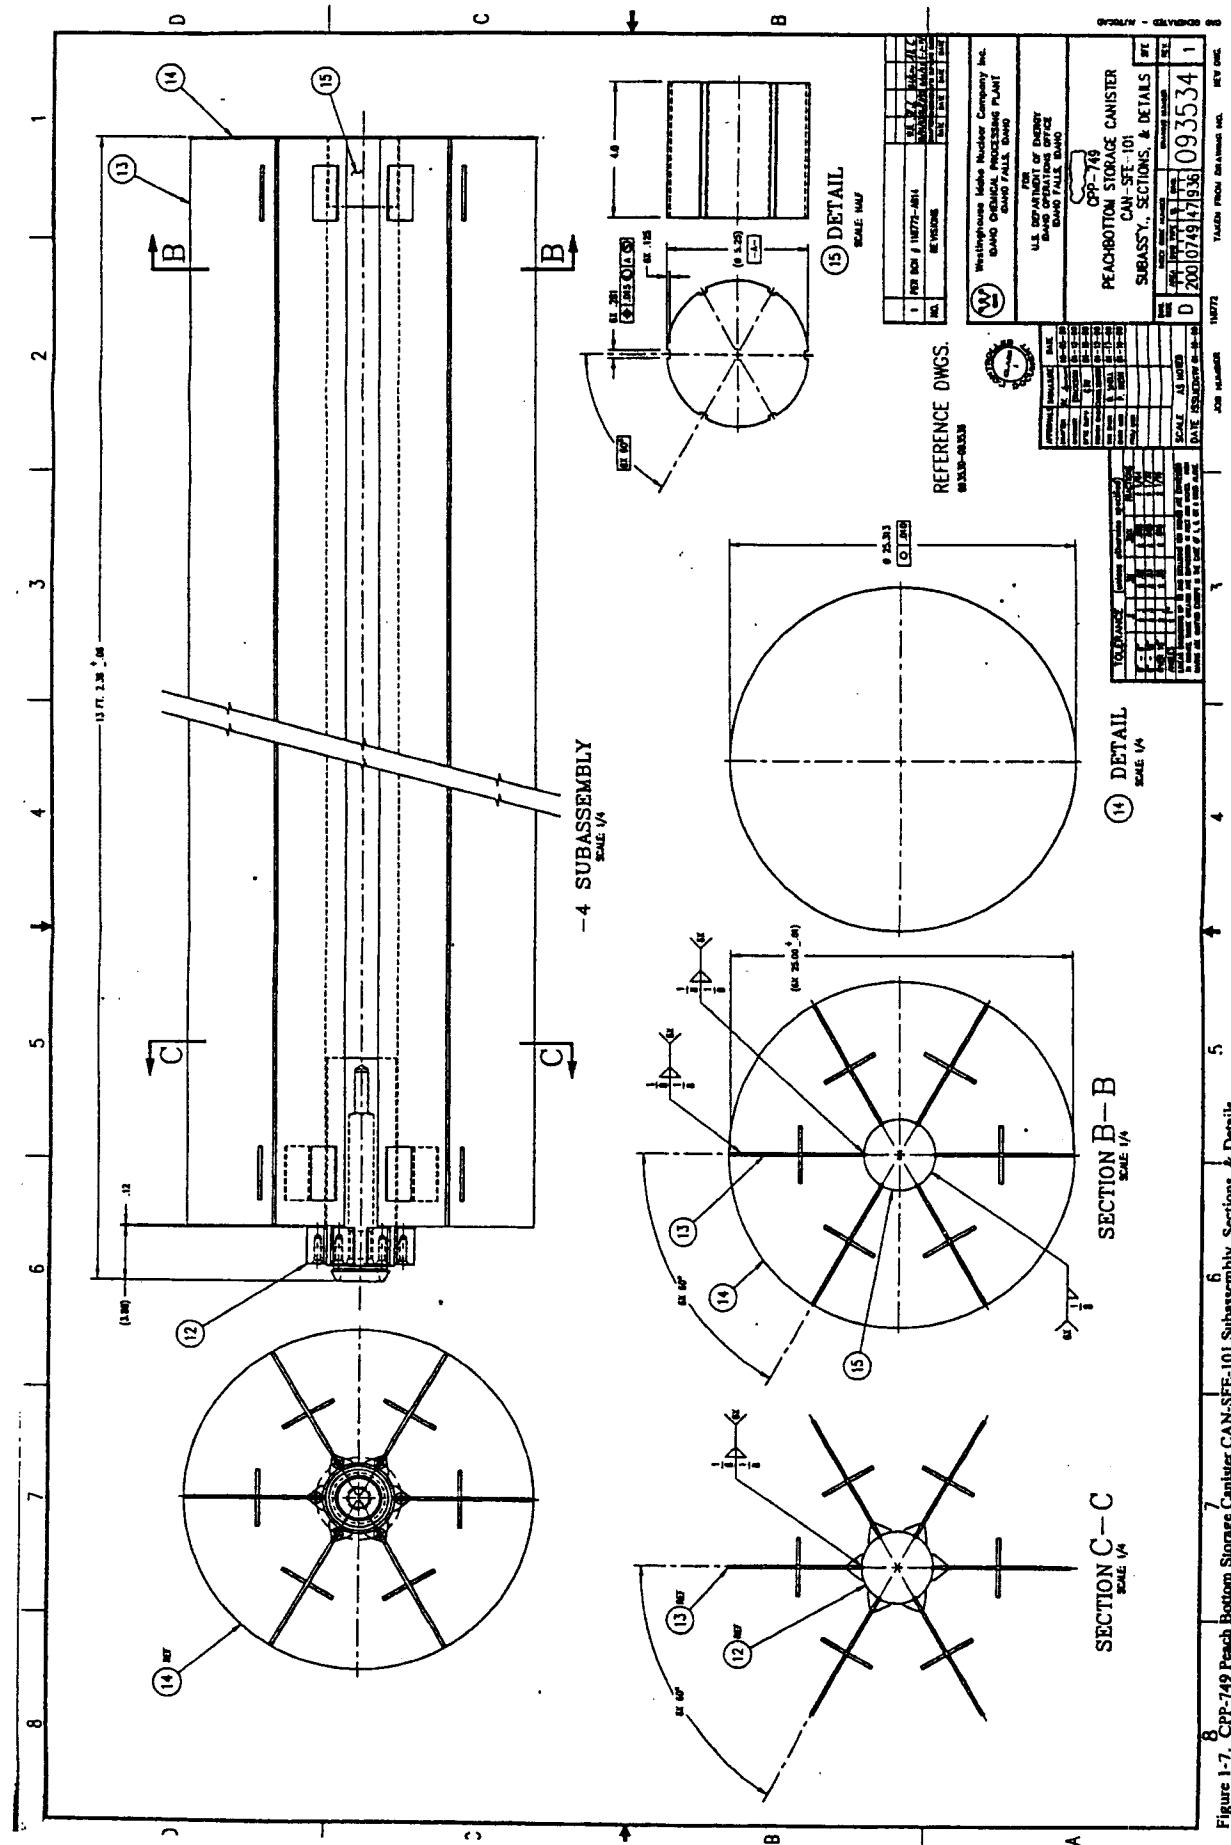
CPP-749 Peach Bottom Storage Canister CAN-SFE-101 Subassembly, Sections, & Details
